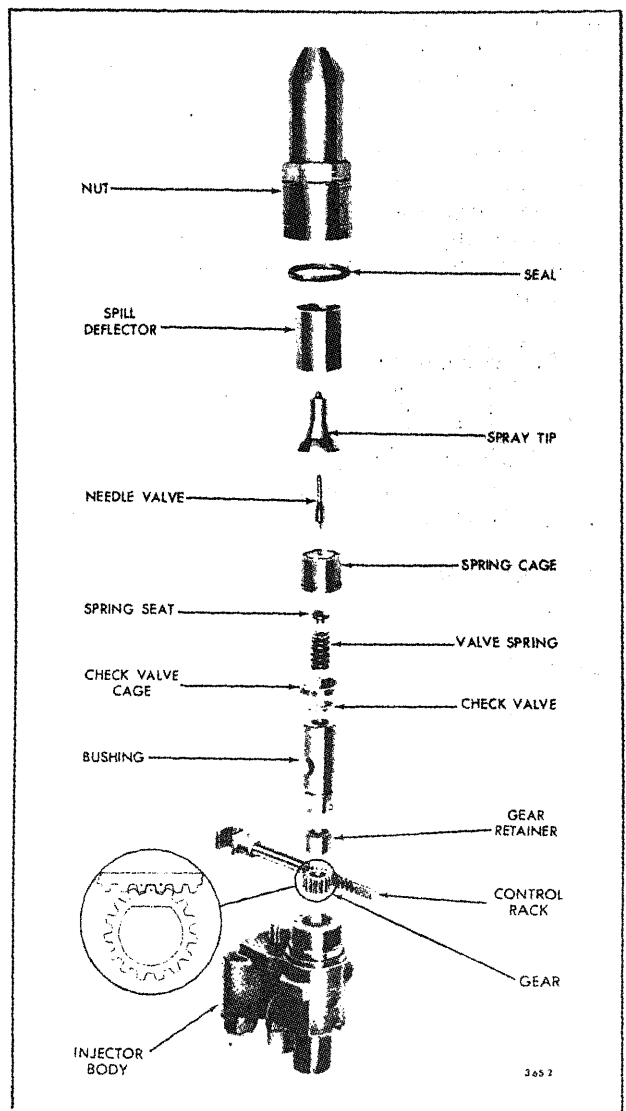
Injector Rack, Gear, Spray Tip and Valve Assembly Details and Relative Location of Parts
